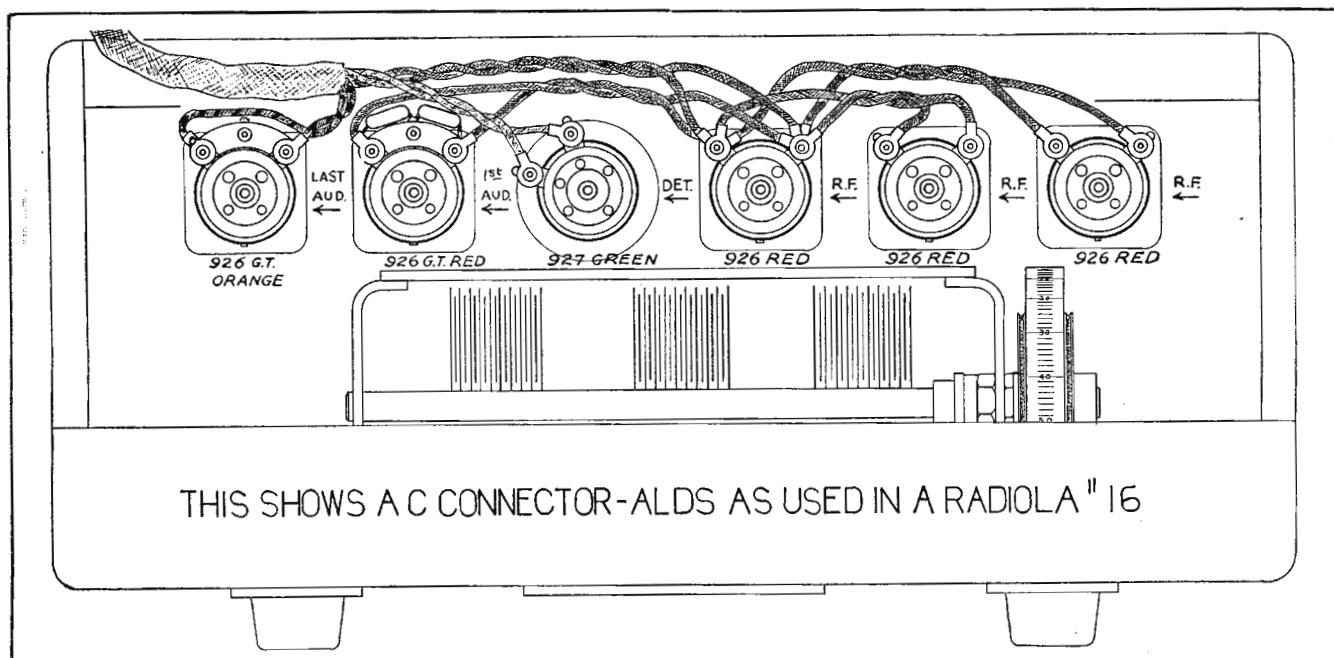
This sketch shows the manner in which the Connectoralds may be used in a factory-made receiver.
